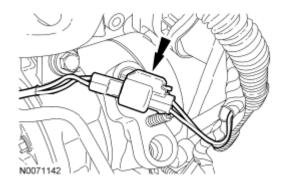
Locating A/C Compressor Electrical Connector Courtesy of FORD MOTOR CO.
